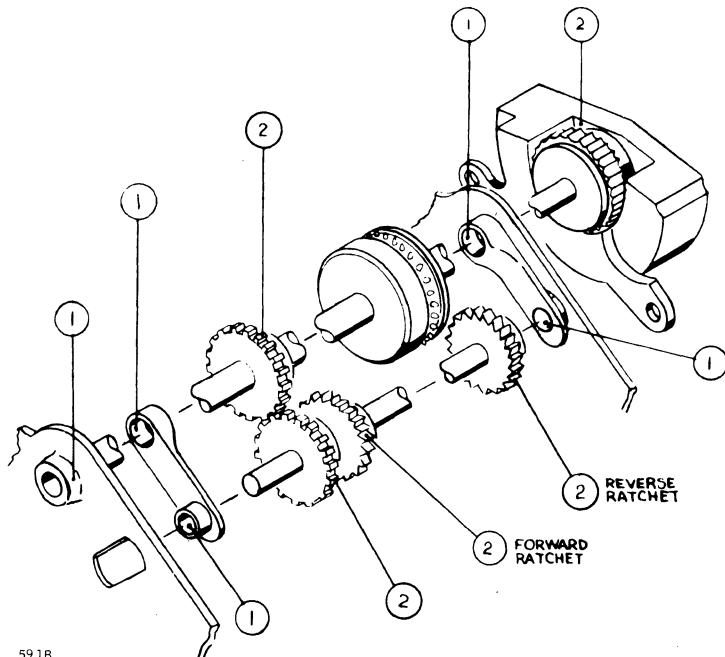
Ratchet, Gear, and Pawl Lubrication Points
